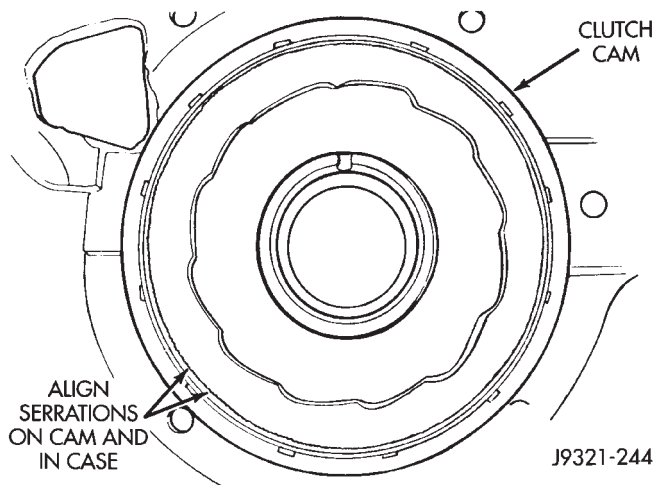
Positioning Replacement Clutch Cam And Spring Retainer—46RH
